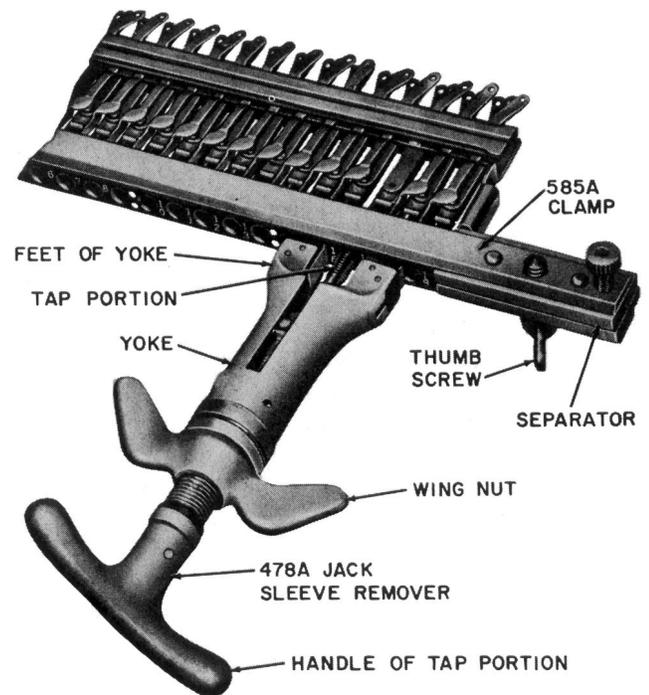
Method of Extracting Sleeve With 478A Jack Sleeve Remover (92-Type Jack Shown)
